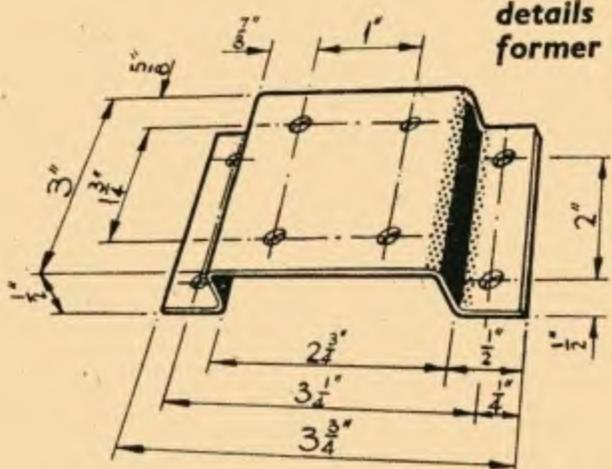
Main chassis dimensions and drilling details of the transformer mounting plate
